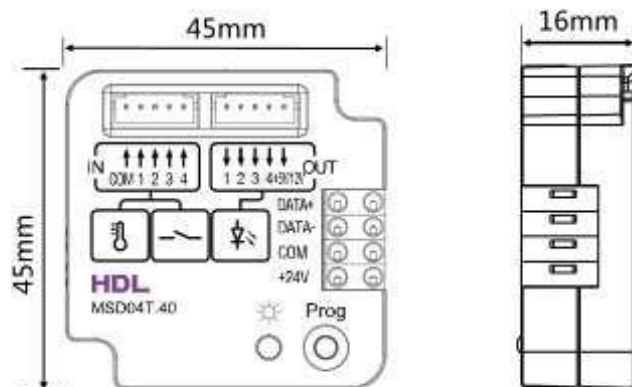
Dimensions-Front View Figure 3. Dimensions-Side View
